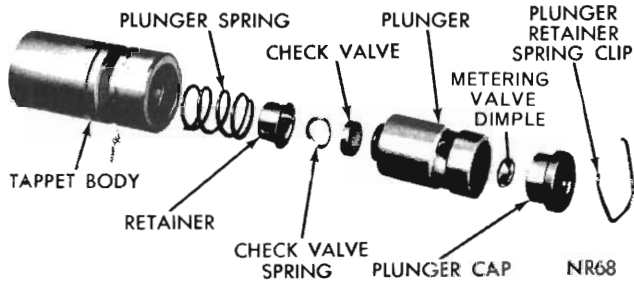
Hydraulic tappet assembly (Disassembled view)
